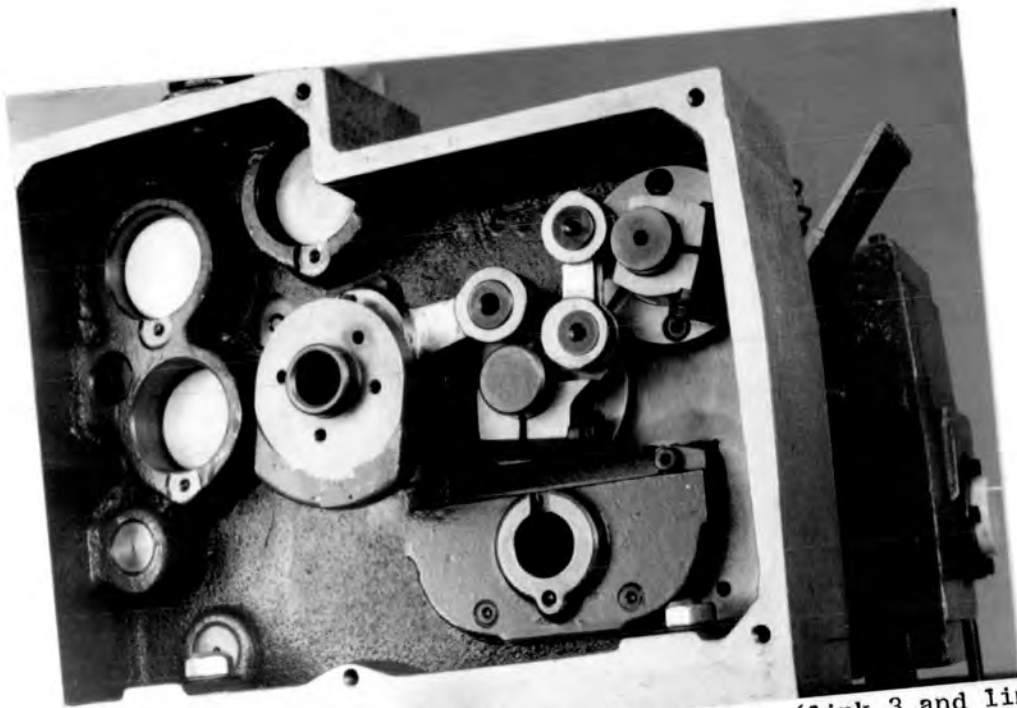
Mechanism, complete with connecting rods (link 3 and link 5)
